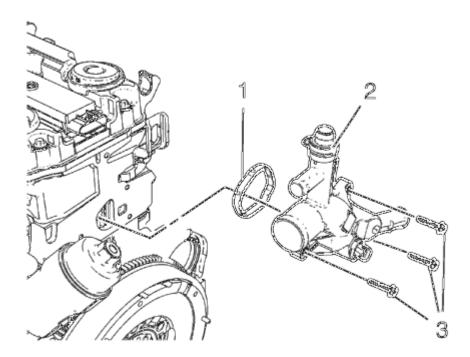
Engine Coolant Thermostat Housing Courtesy of GENERAL MOTORS COMPANY
